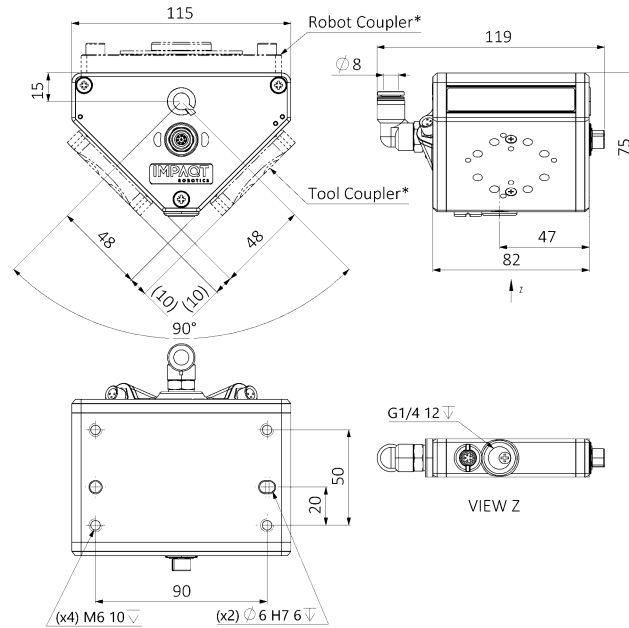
PQ90 Drawing; the phantom lines denote couplers. All dimensions in mm.
